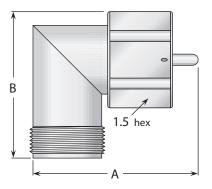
(Right angle plug-jack; connects one plug and one jack)
